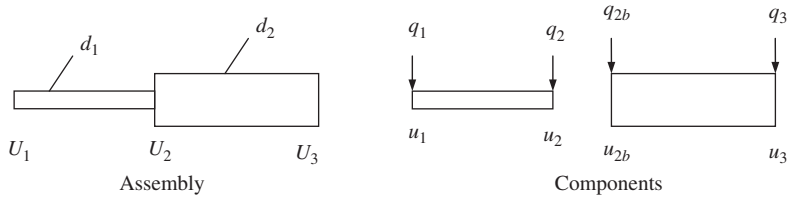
Stepped shaft assembly and components. Diameters d_1 and d_2 are identified in the assembly schematic.
